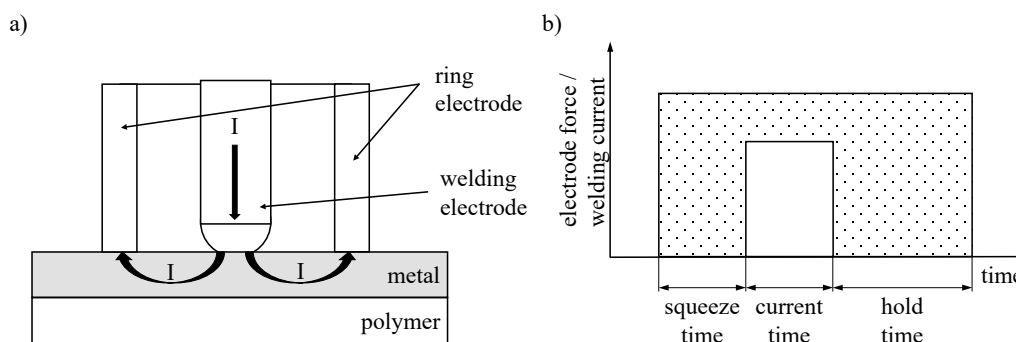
(a) Schematic configuration of the welding tool; (b) used welding cycle
